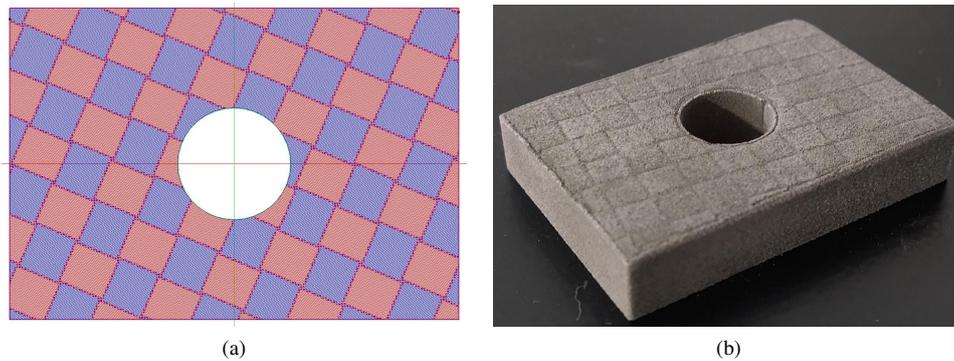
Chessboard strategy for L-PBF and DED (a) and printed part in an Alkimat Laser Funde 200 machine (b).
